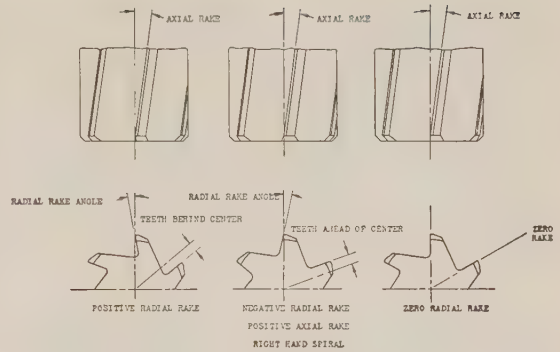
TYPES OF RADIAL AND AXIAL RAKE
